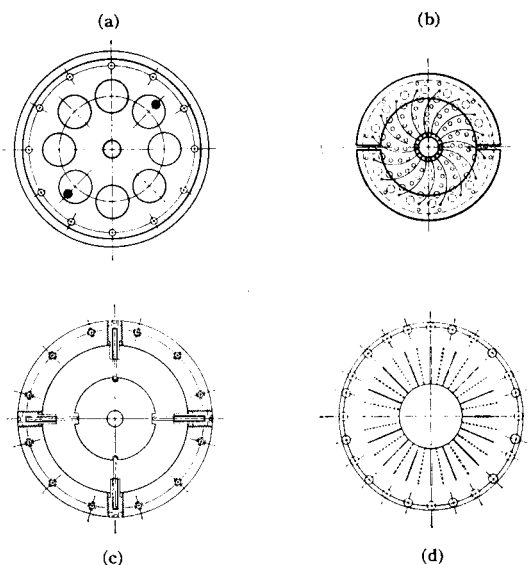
Axial views of the hot plate assembly in the planes A, B, C, and D shown in Fig. 1.
